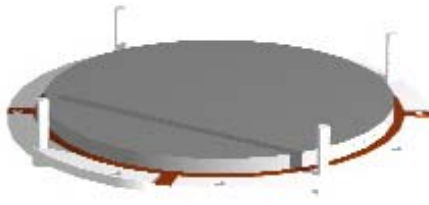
Assembly of MCP-stack - Stage 2b (DLD40, DLD80 & HEX80)
